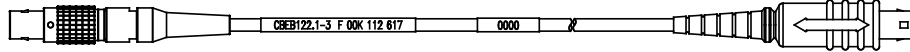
Shielded Automotive-Ethernet cable CBEB122.1-3
